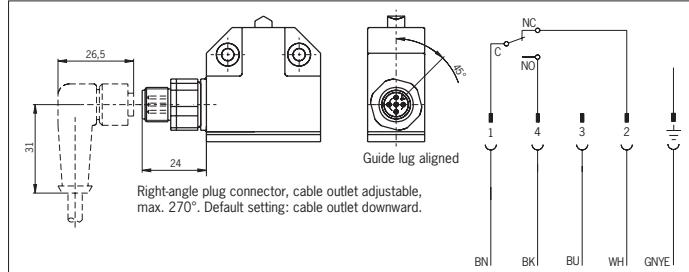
Dimension drawing/connection diagram for N01.550/562SVM5 with plug connector M12 (SVM5, 5-pin)
